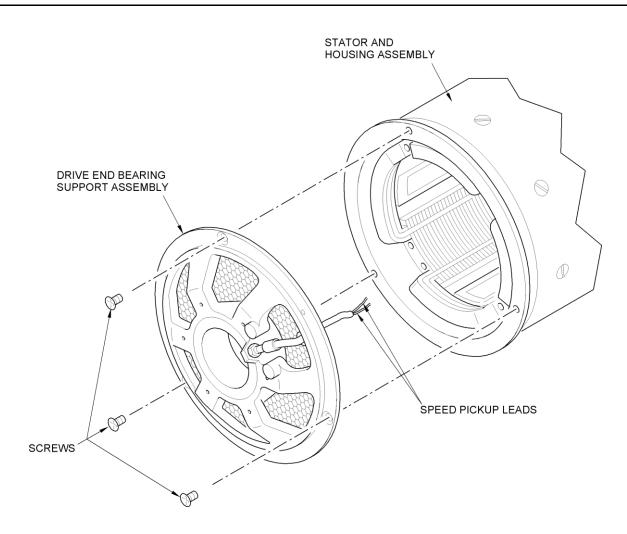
Installing Drive End Bearing Support Assembly (Non-Preload)
